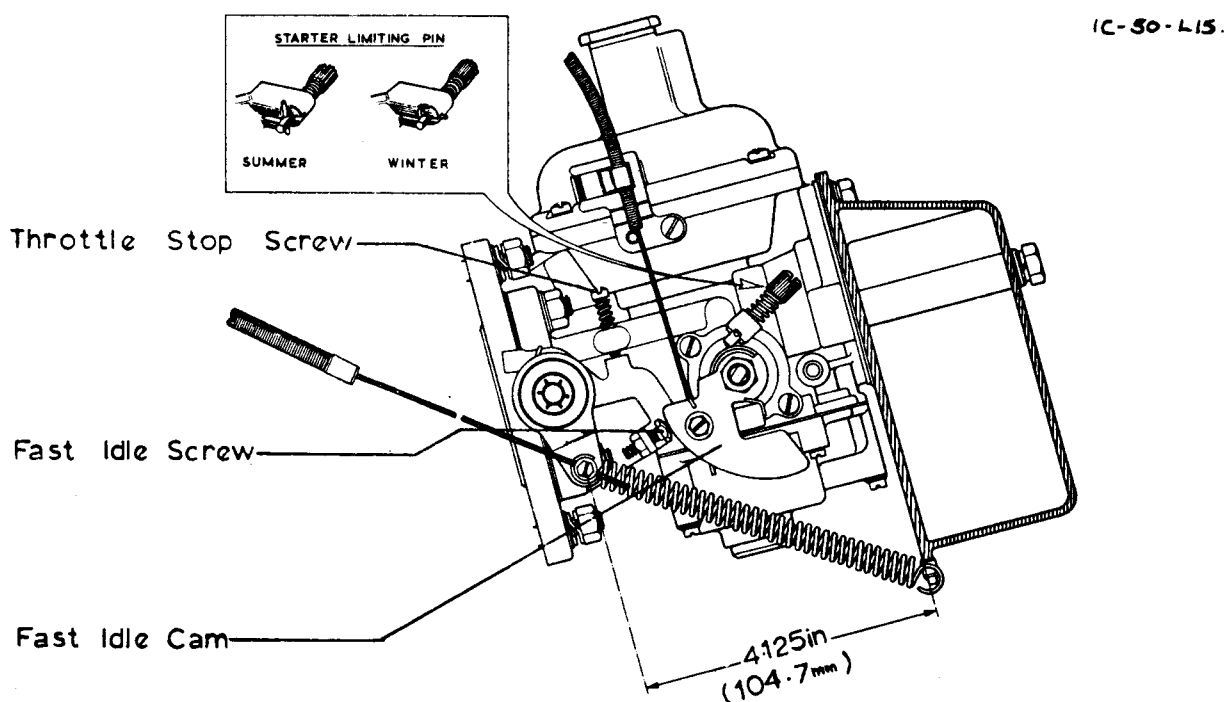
ADJUSTING SCREWS & THROTTLE LEVER SETTING
